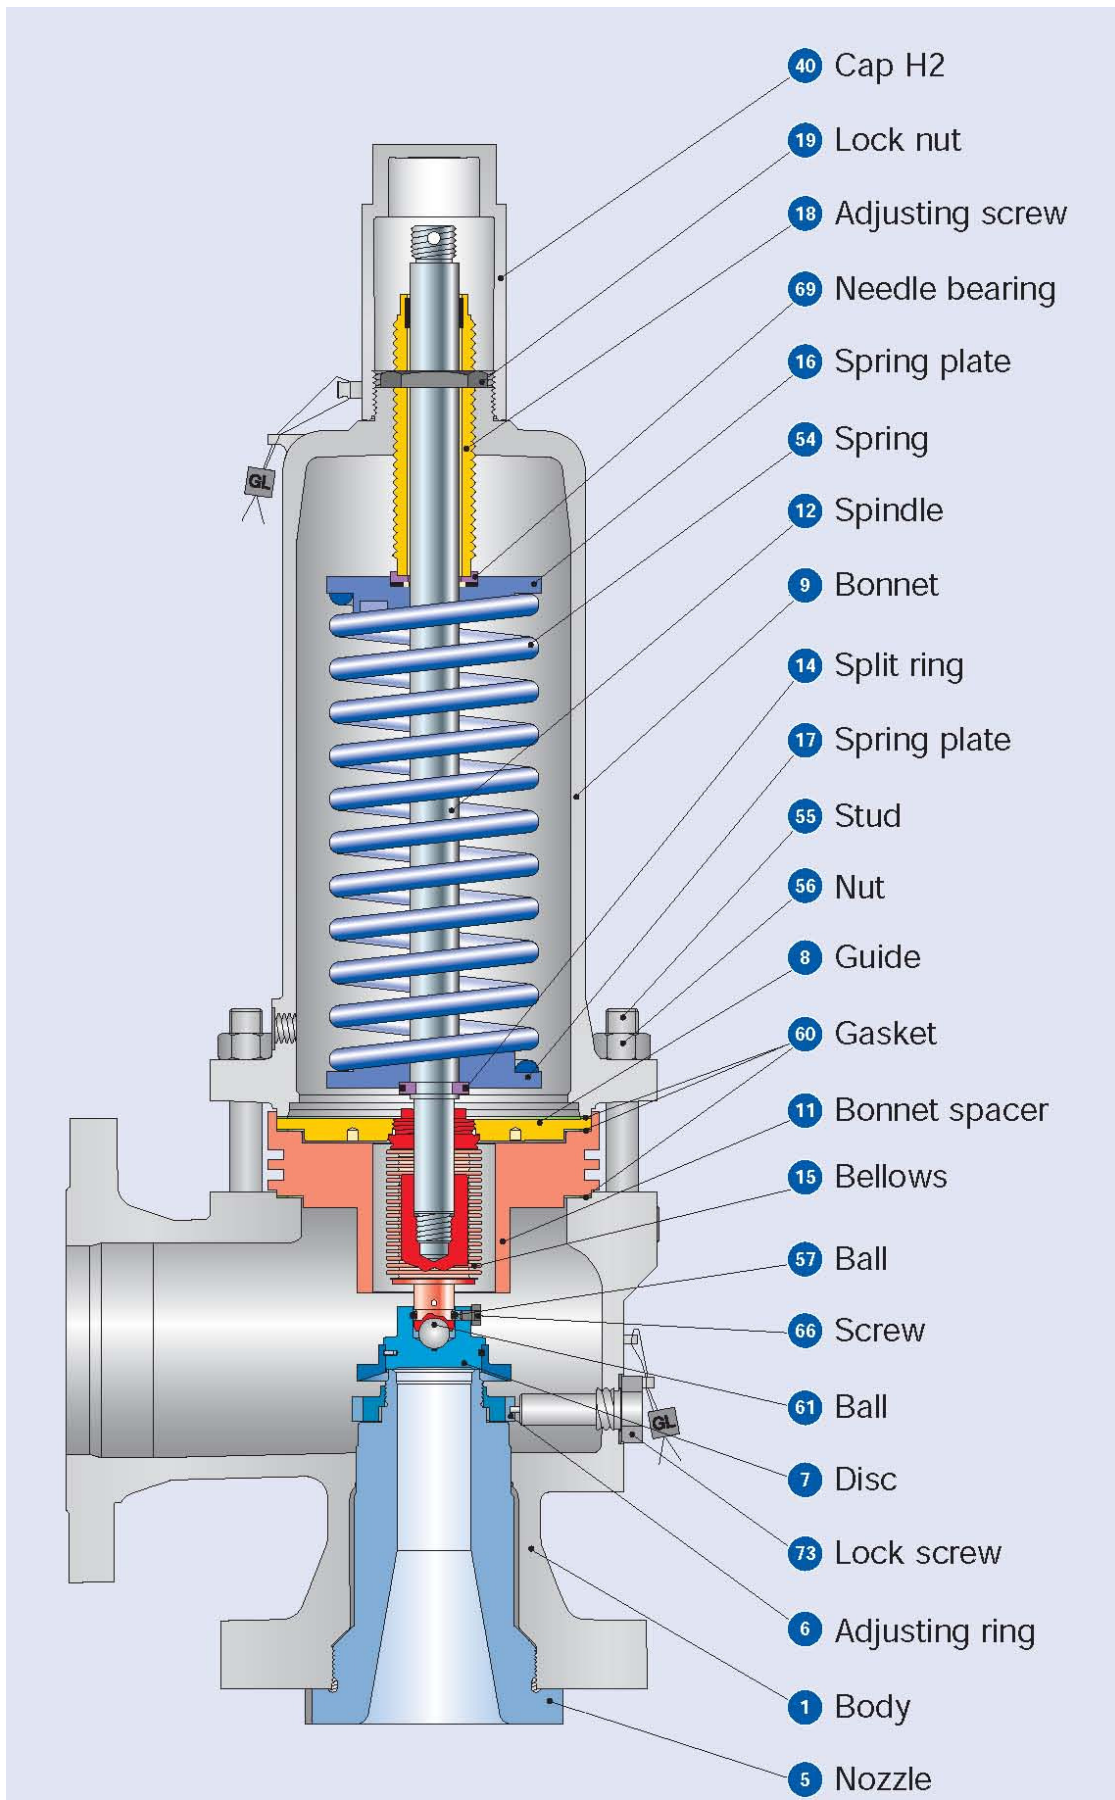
Parts of a Balanced Bellows Spring Loaded Safety Valve - Flanged
